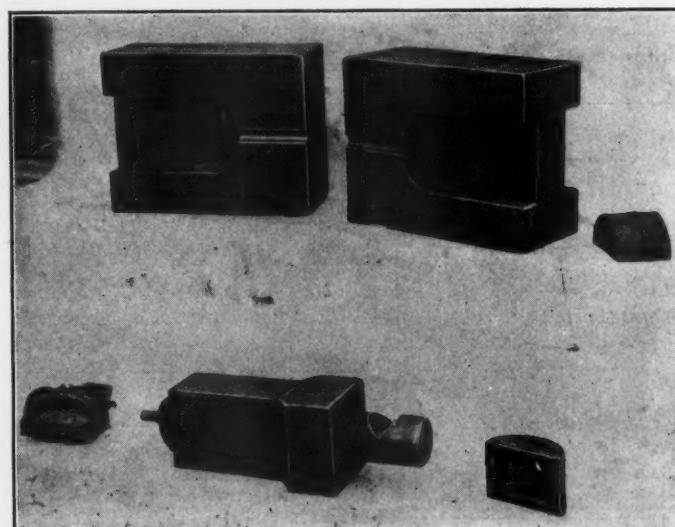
DIES AND FORMER FOR DRAWBAR YOKE FILLER.
